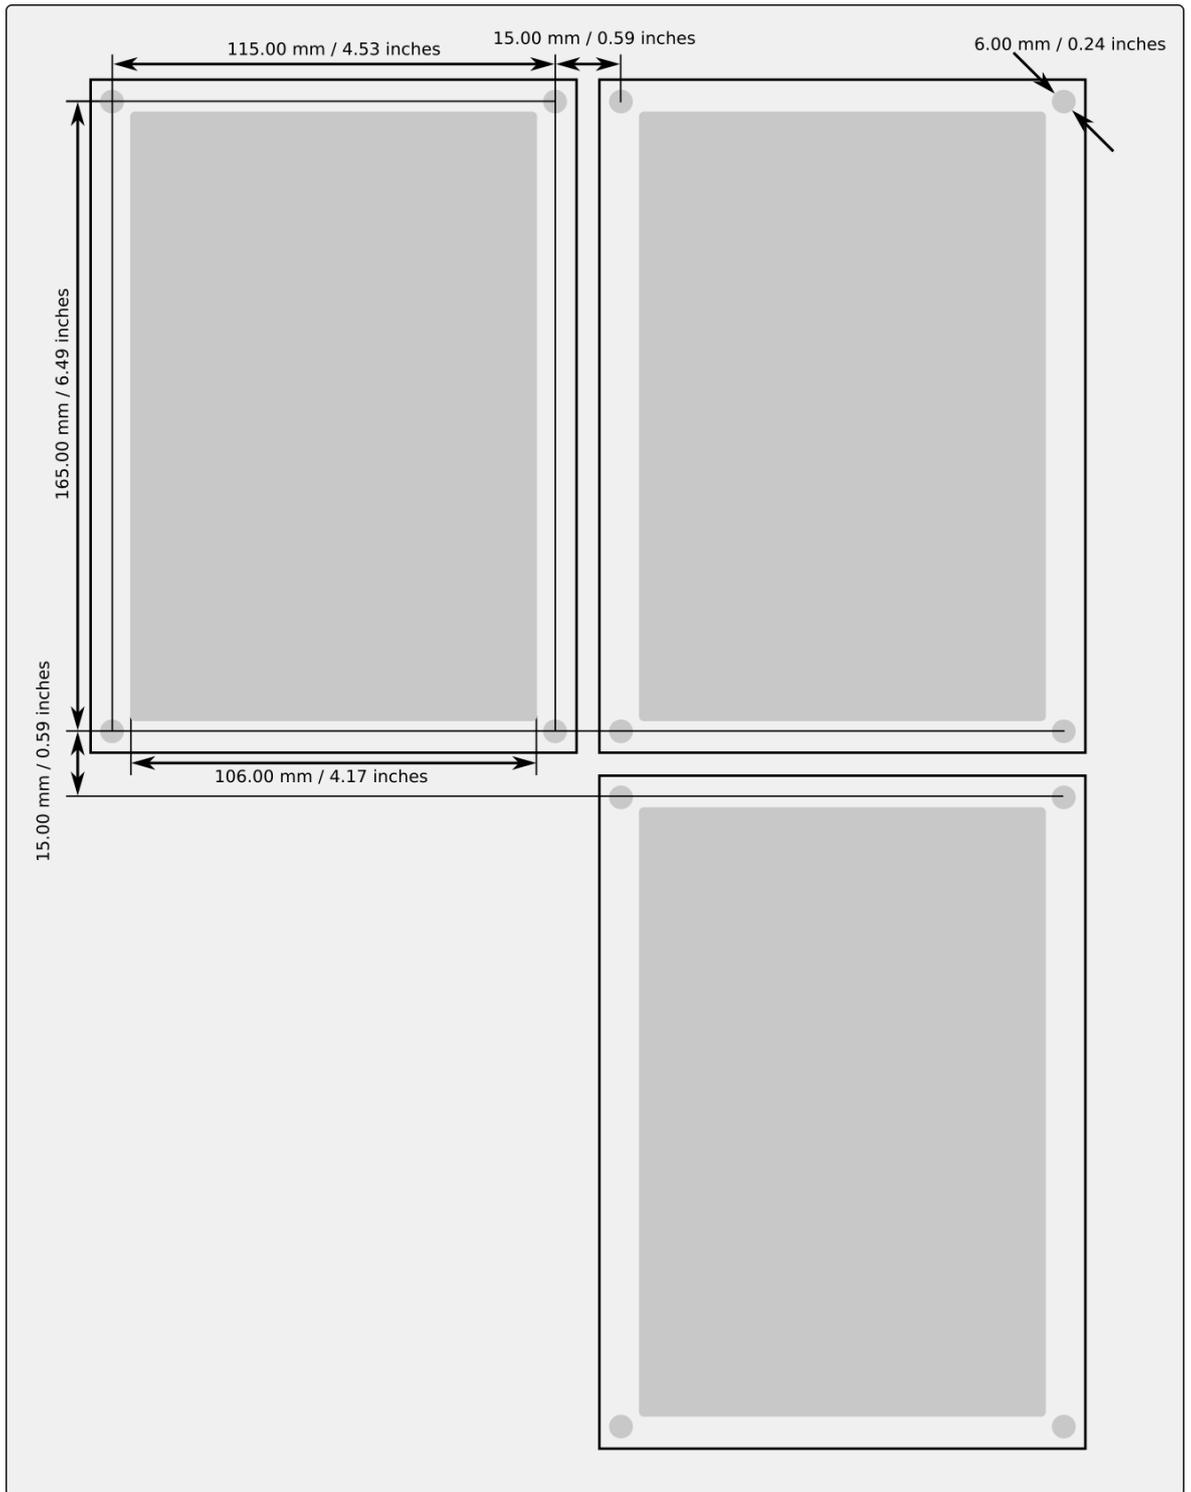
255. Panel cutout dimensions and device spacing.
